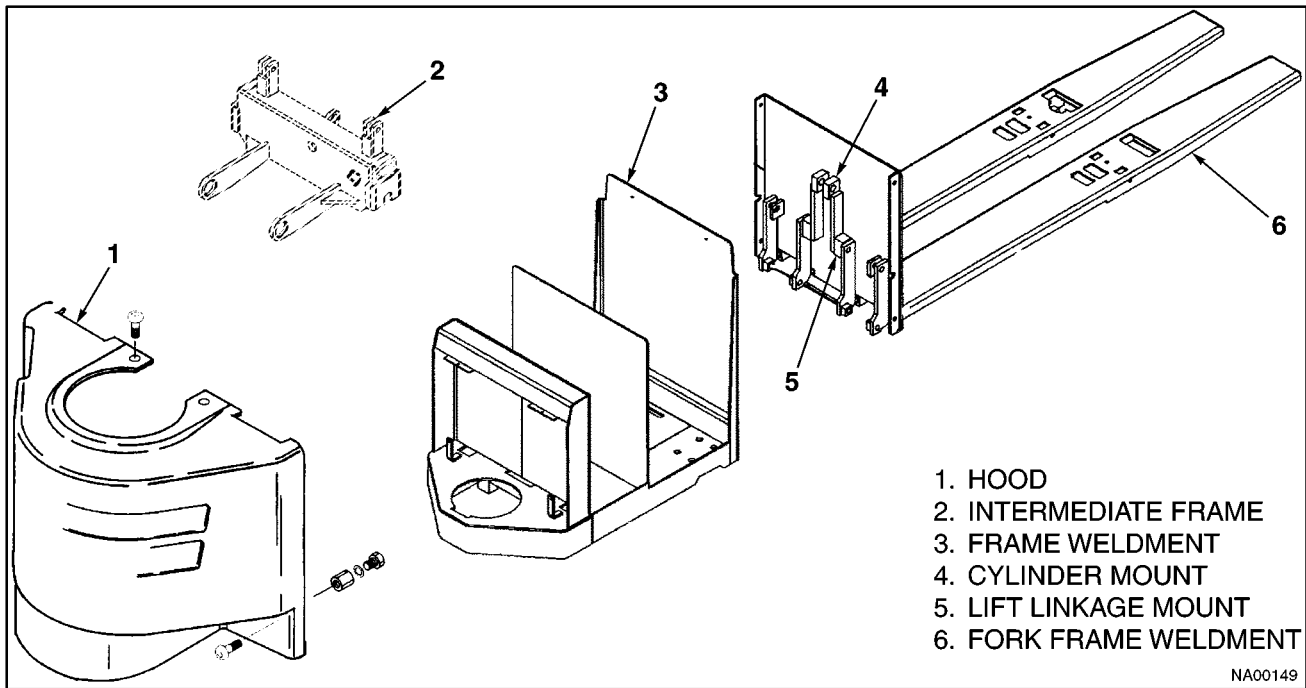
FRAME WELDMENT – CA60-80XT
